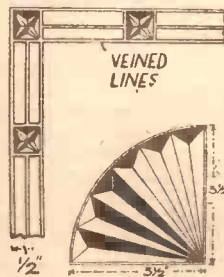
An enlarged view of the carving, making it quite easy to set out and cut.
